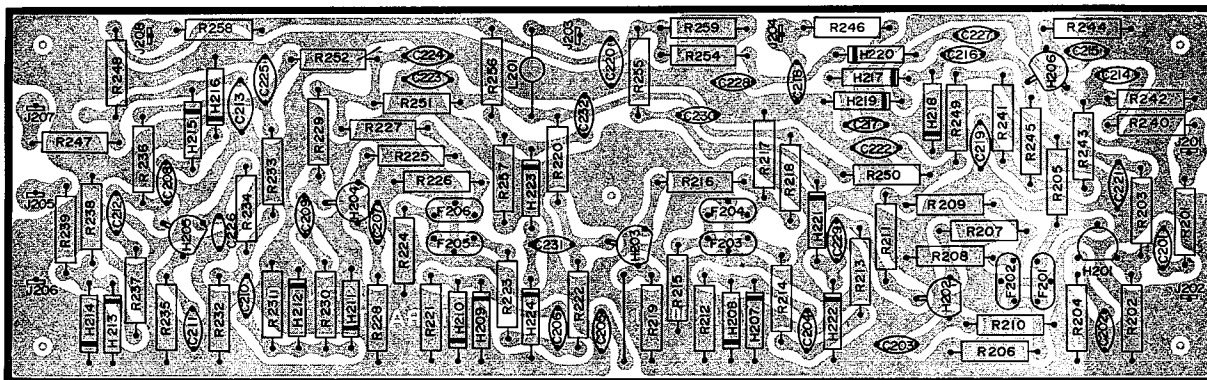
FM IF Amplifier Assembly P200 Component Locations
